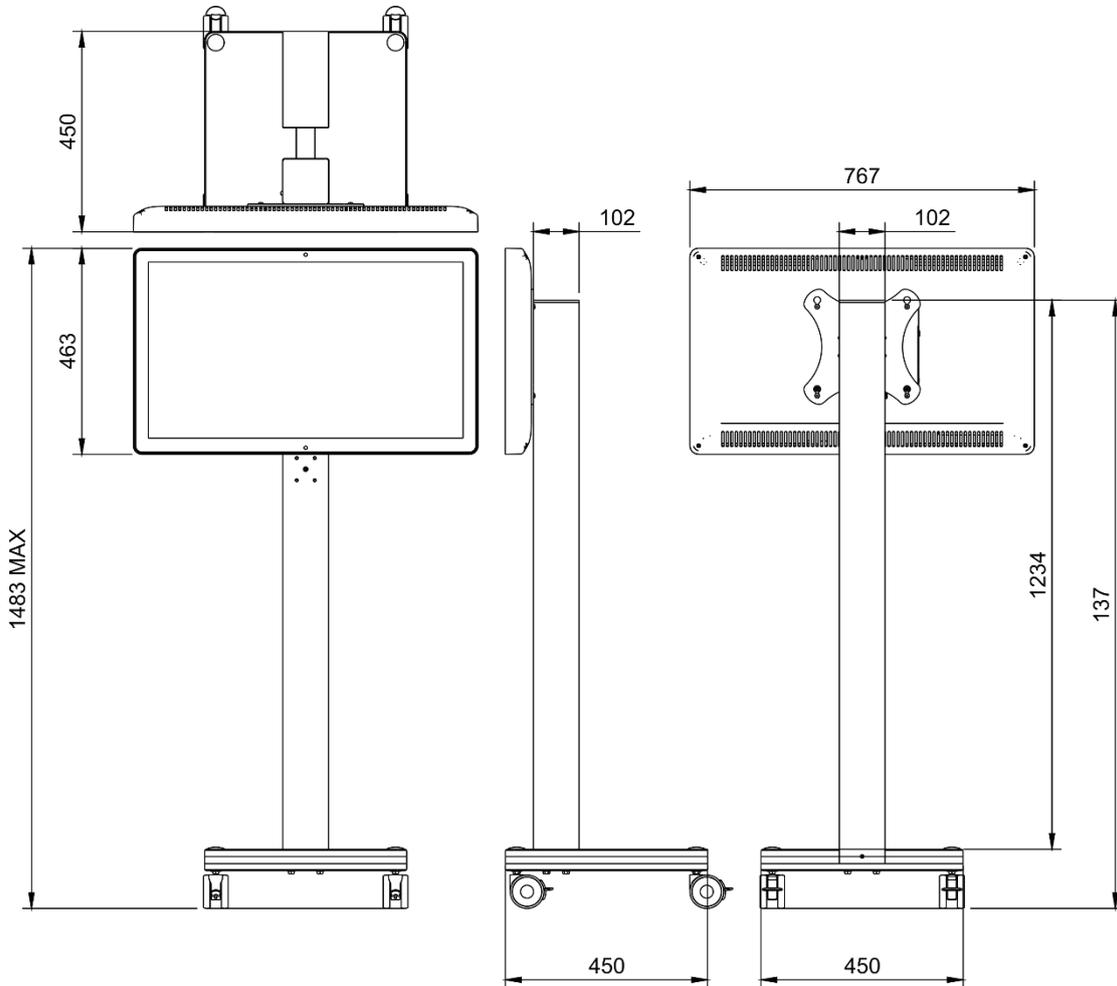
Dimensions (mm) of monitor on trolley at highest mounting point.
